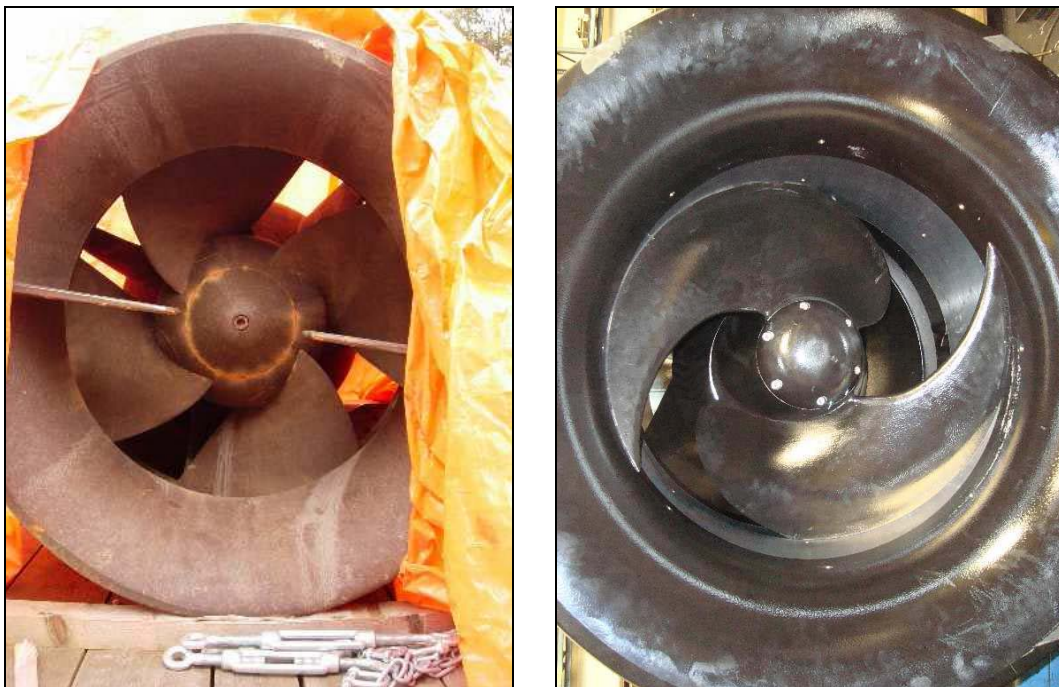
Conventional impeller shape (left) and FFI impeller shape (right).
